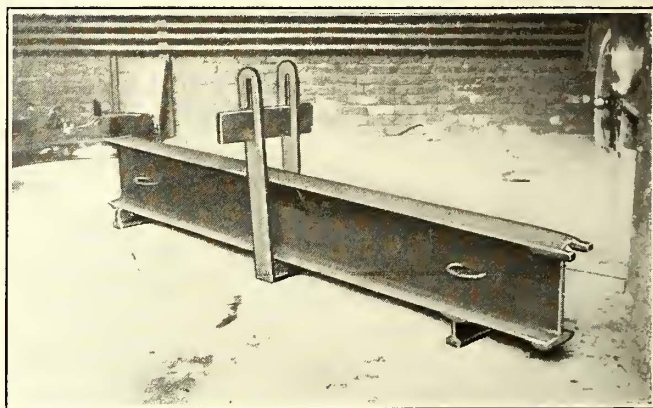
DEVICE FOR REMOVING SURFACE BENDS IN ELECTRIC RAILWAY TRACK
